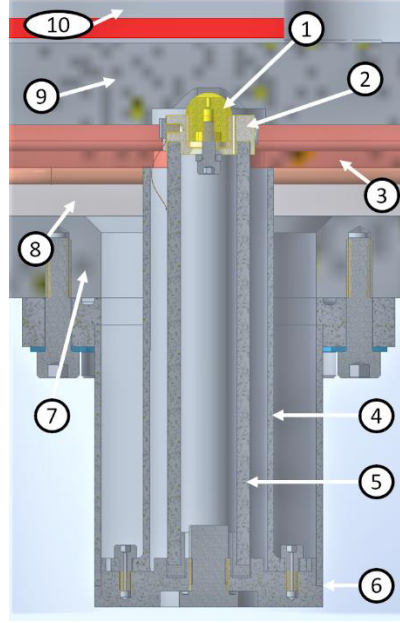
CAD Screenshot of a cryo-support assembled on the ALPHA-g cryostat. A more detailed technical drawing can be found in appendix Figure C.3. The labelled numbers indicate the following parts: (1) Levelling screw, (2) connecting piece, (3) copper shield bottom plate, (4) outer G-10 tube, (5) inner G-10 tube, (6) bottom of cryo-support cup, (7) OVC-enclosure bottom plate, (8) OVC, (9) bottom of He-box and (10) inside of He-box containing LHe.
